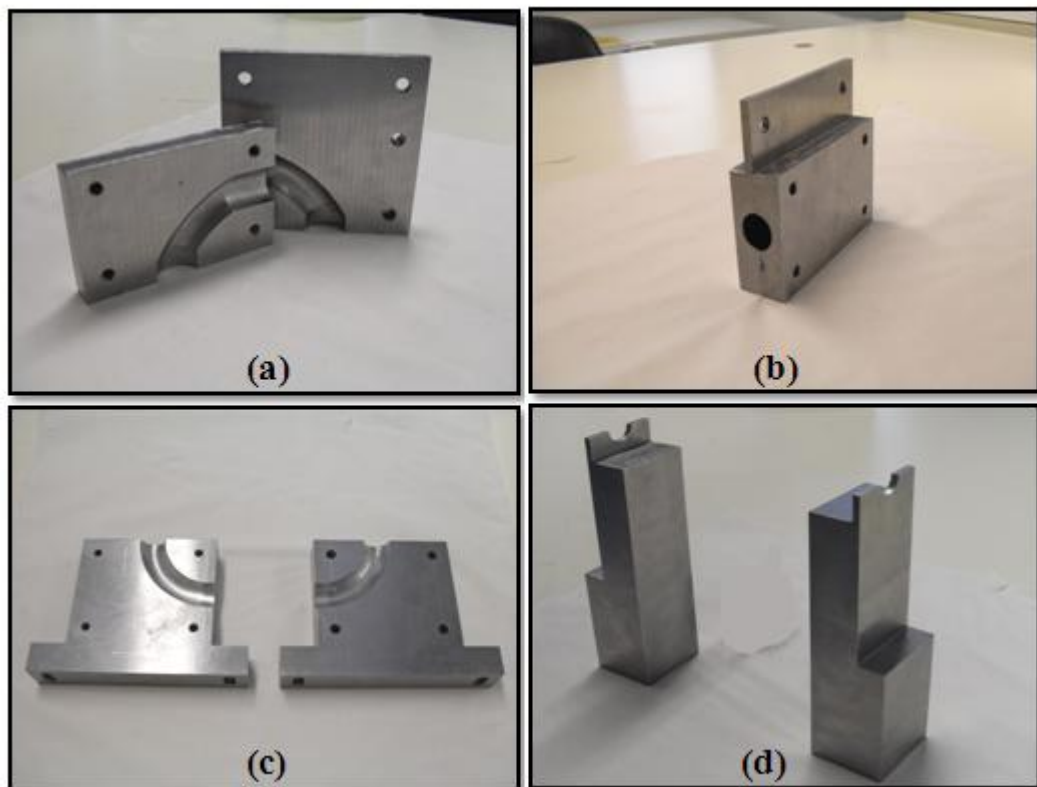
Bespoke grips for BA: (a), (b) upper grips for torsion test, (c) lower grips for torsion test and (d) holders for shear and bending moment test
